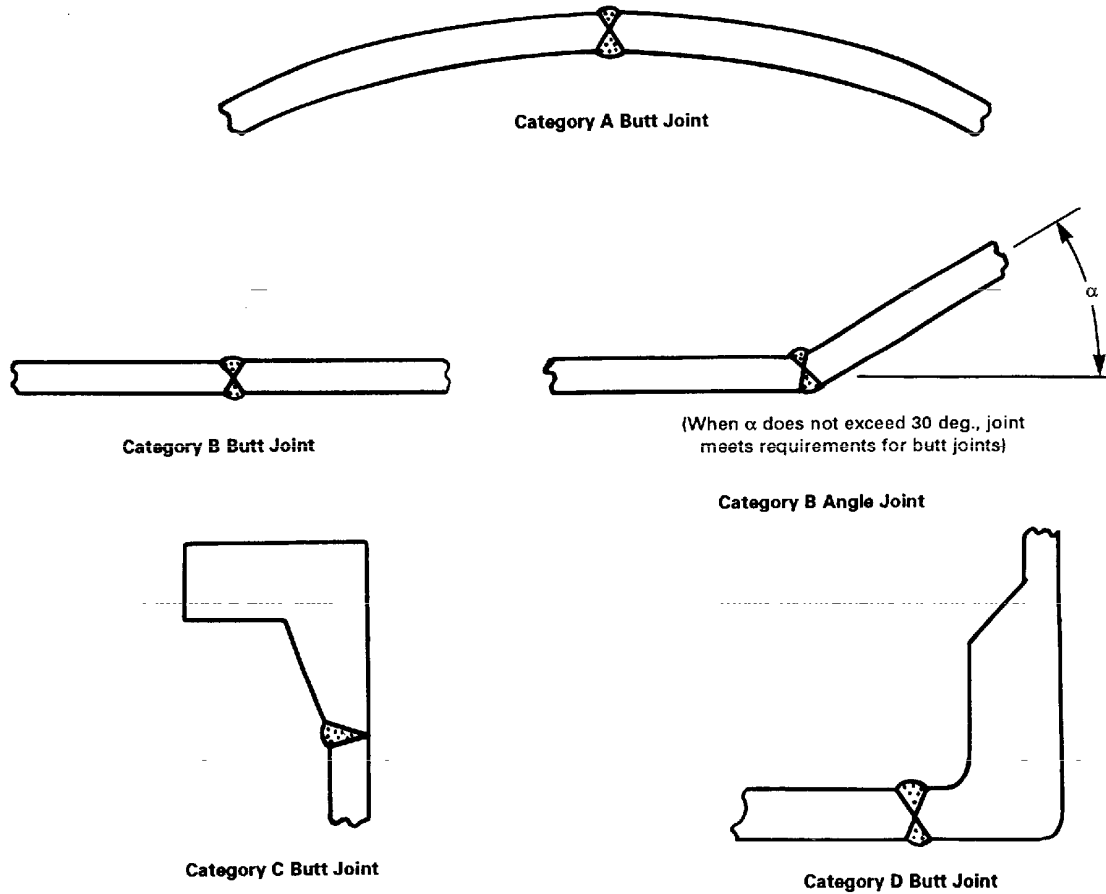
TYPICAL BUTT JOINTS
